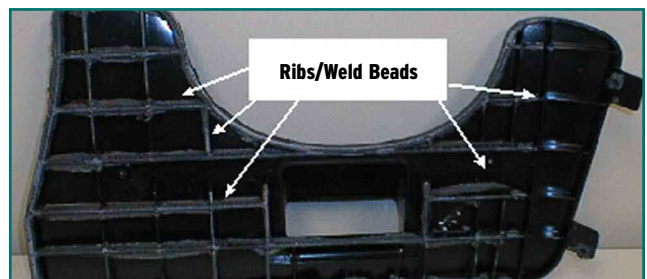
19 Instrument Panel Foamed/Covered with Linear Welded Parts
